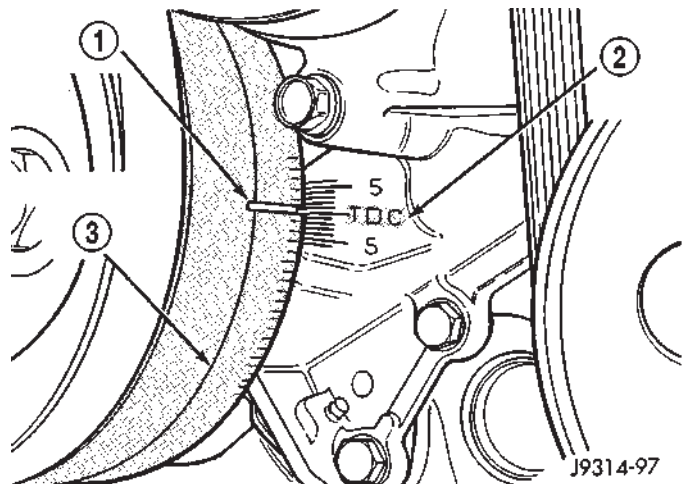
Damper-To-Cover Alignment Marks—Typical
